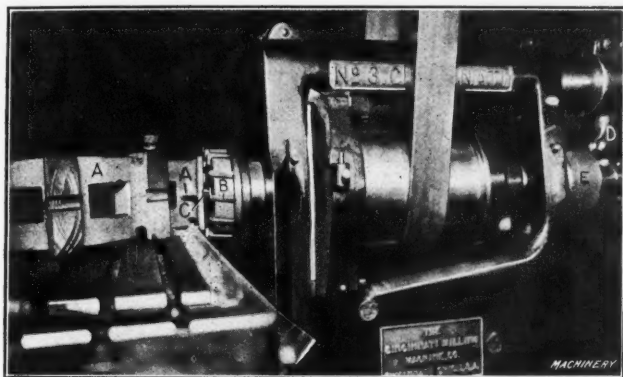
Two-speed Milling Attachment for machining Alternating-current Motor Body Castings
